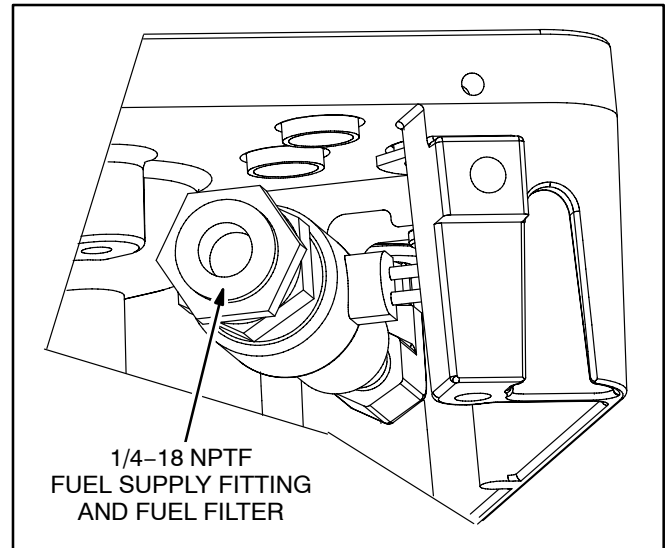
FUEL FITTING—LEFT END OF BASE
